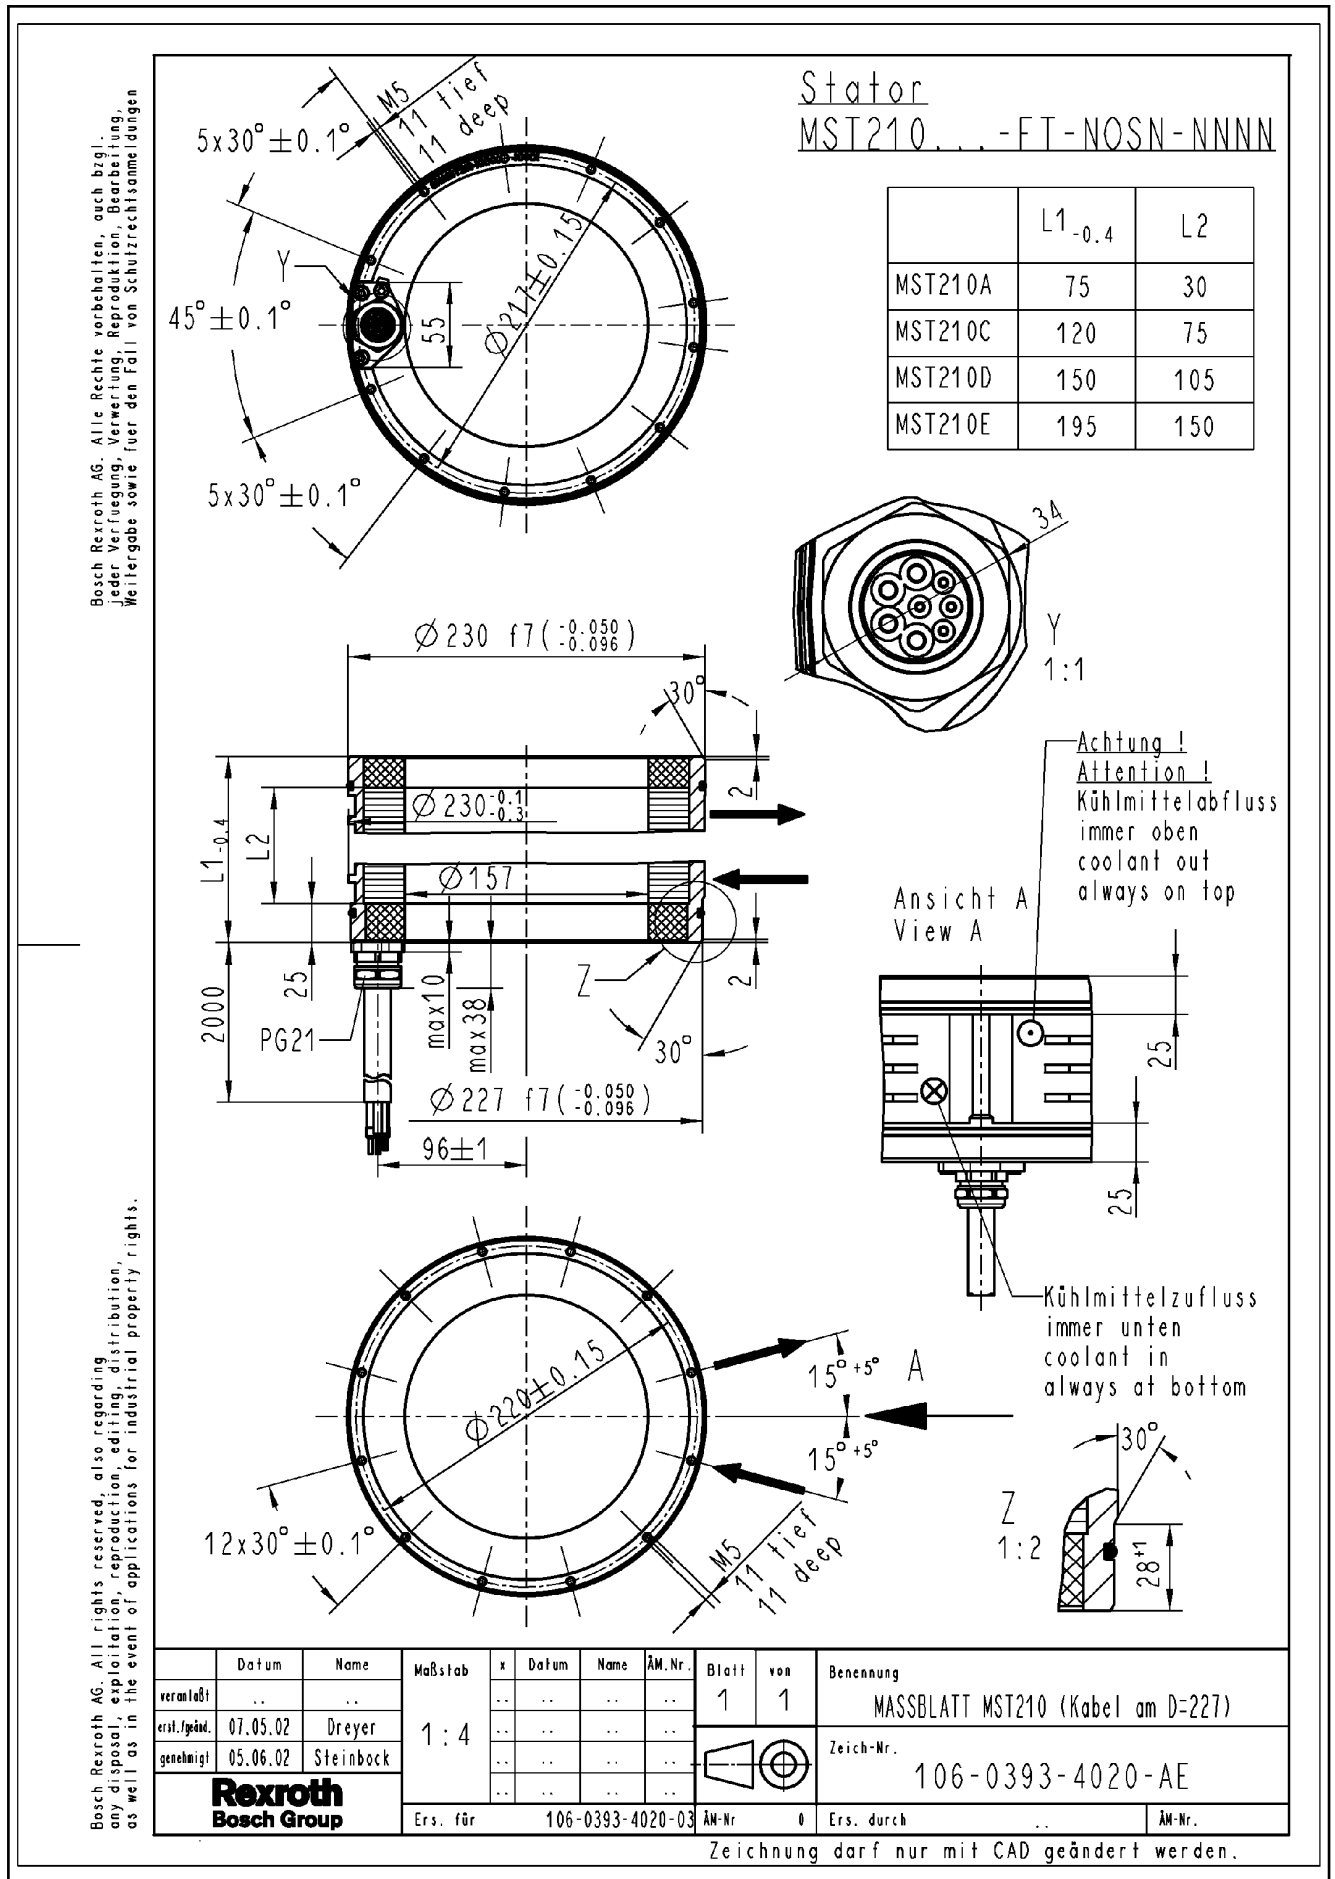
Dimension sheet MST210, electrical connection "SN"
